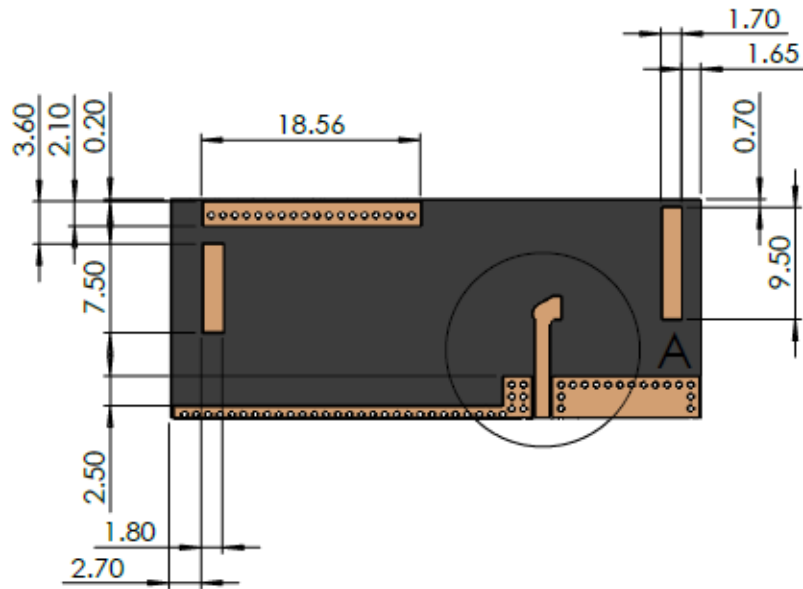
Footprint of the AC31700-01B on the top PCB layer. The main antenna has one feeding pad, 2 pads for mechanical fixation and 1 pad with vias to connect to the bottom PCB layer.
